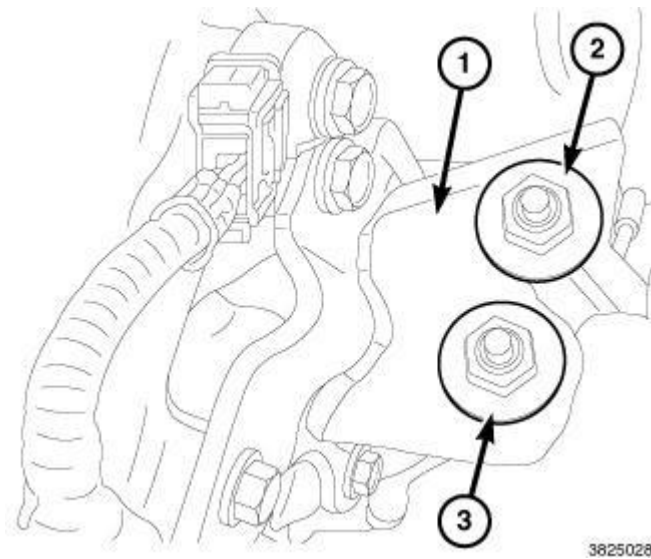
Upper Engine Bracket, Mount & Bolts - Right
